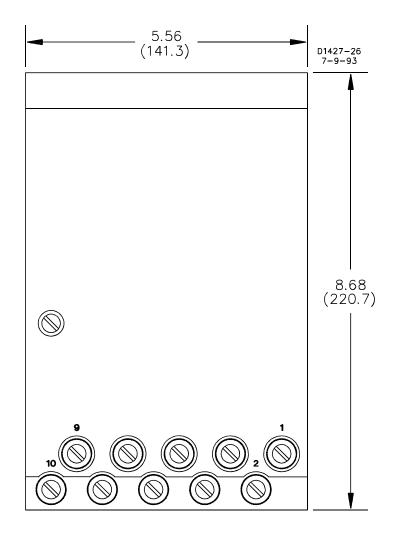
S1 Case, Single-Ended, Semi-Flush Mounting, Outline Dimensions, Rear View
